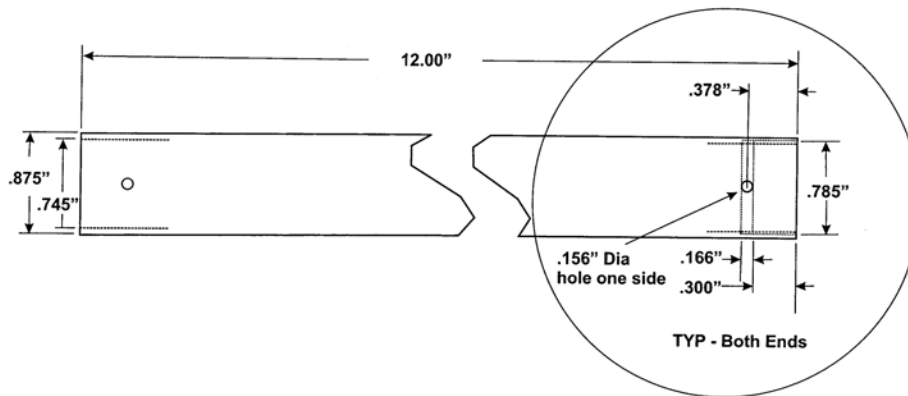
Trolley Tube Smokey Sam Trolley Assembly – Parts Identified
